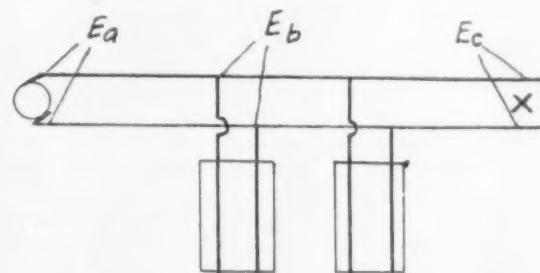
A LAYOUT OF PLATING TANK CONNECTIONS.
